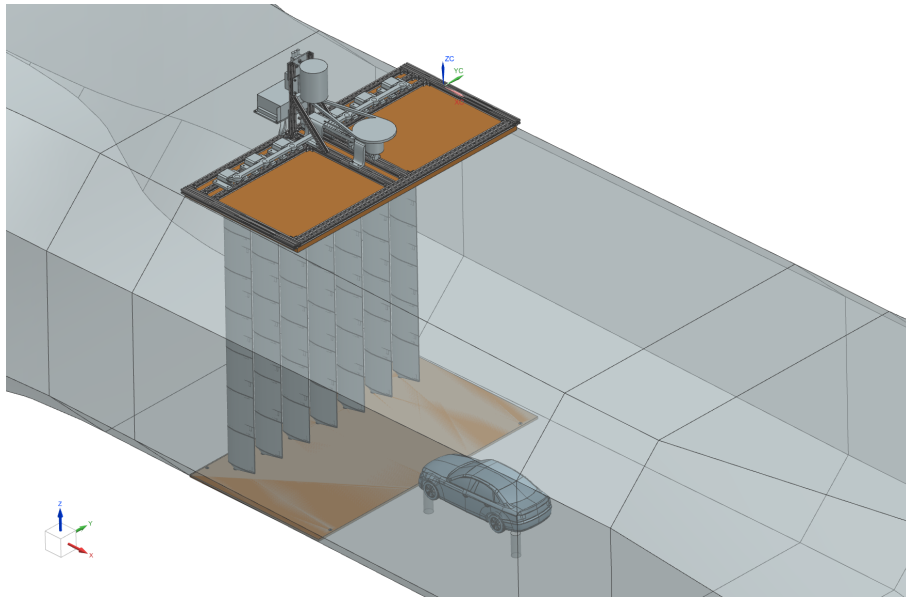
Isometric View of the entire Assembly with DrivAer Model and wind tunnel
